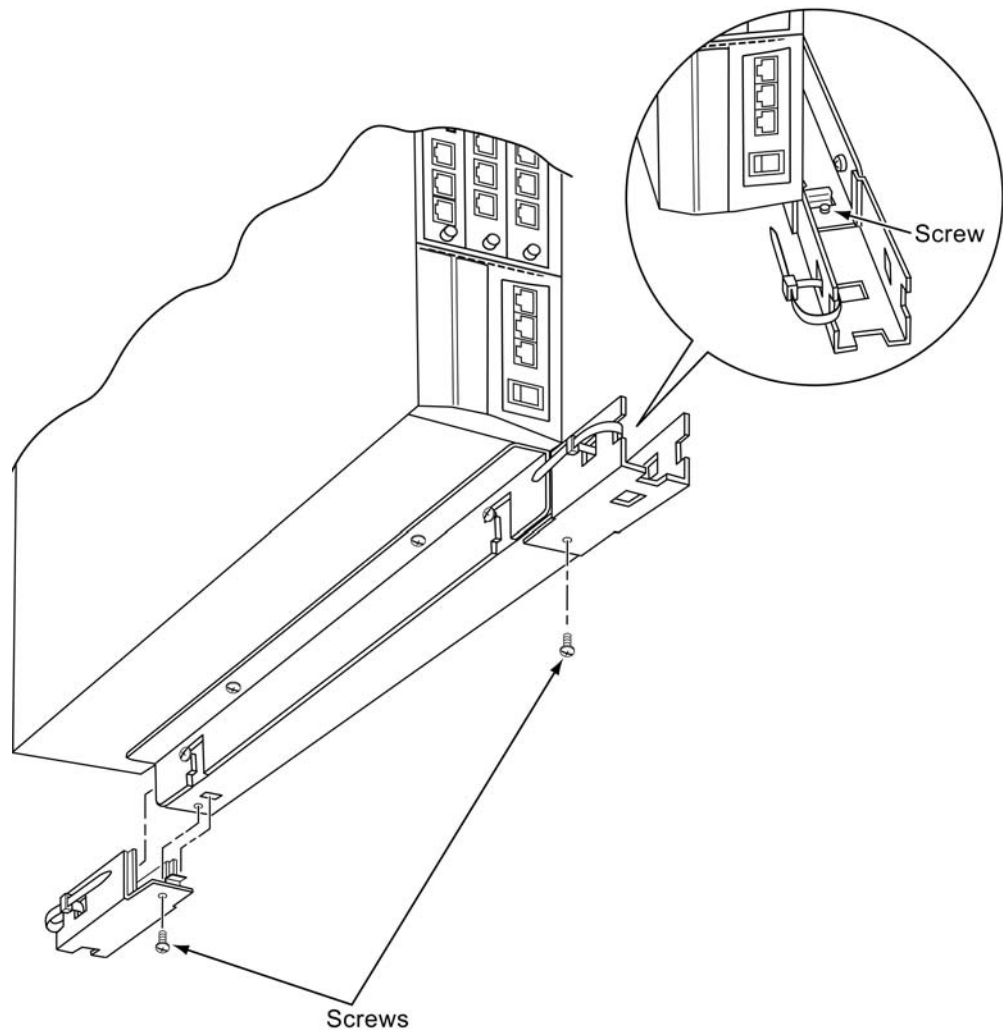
Attach Cable Support Bracket to Lower Wall Mount Bracket
